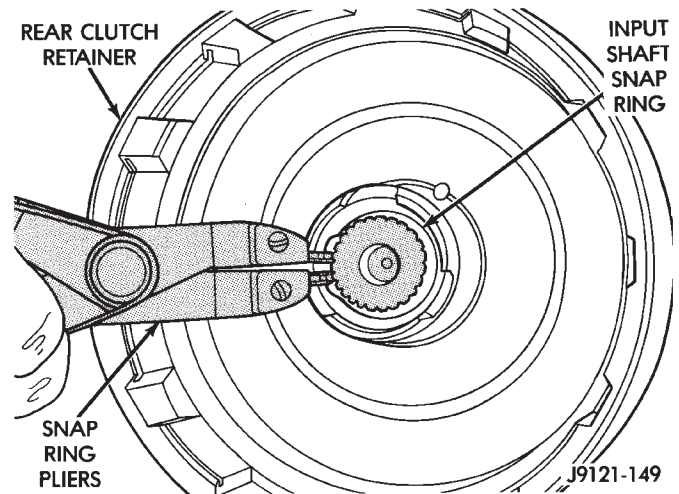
Removing/Installing Input Shaft Snap-Ring
